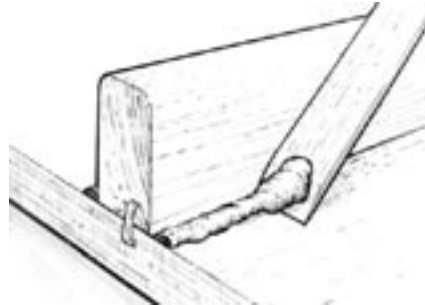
Remove excess epoxy before it begins to gel. A sharpened mixing stick makes an excellent cleanup tool.
